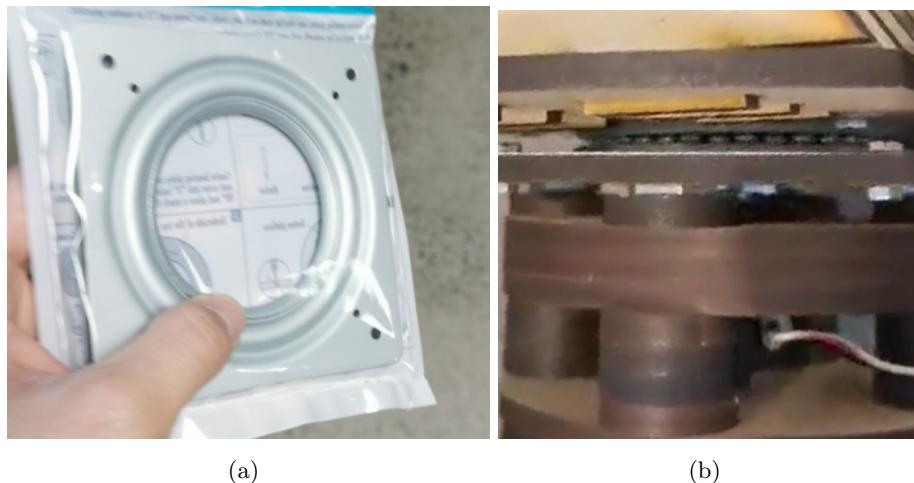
(a) Thrust Bearing Purchased (b) Installed Thrust Bearing
